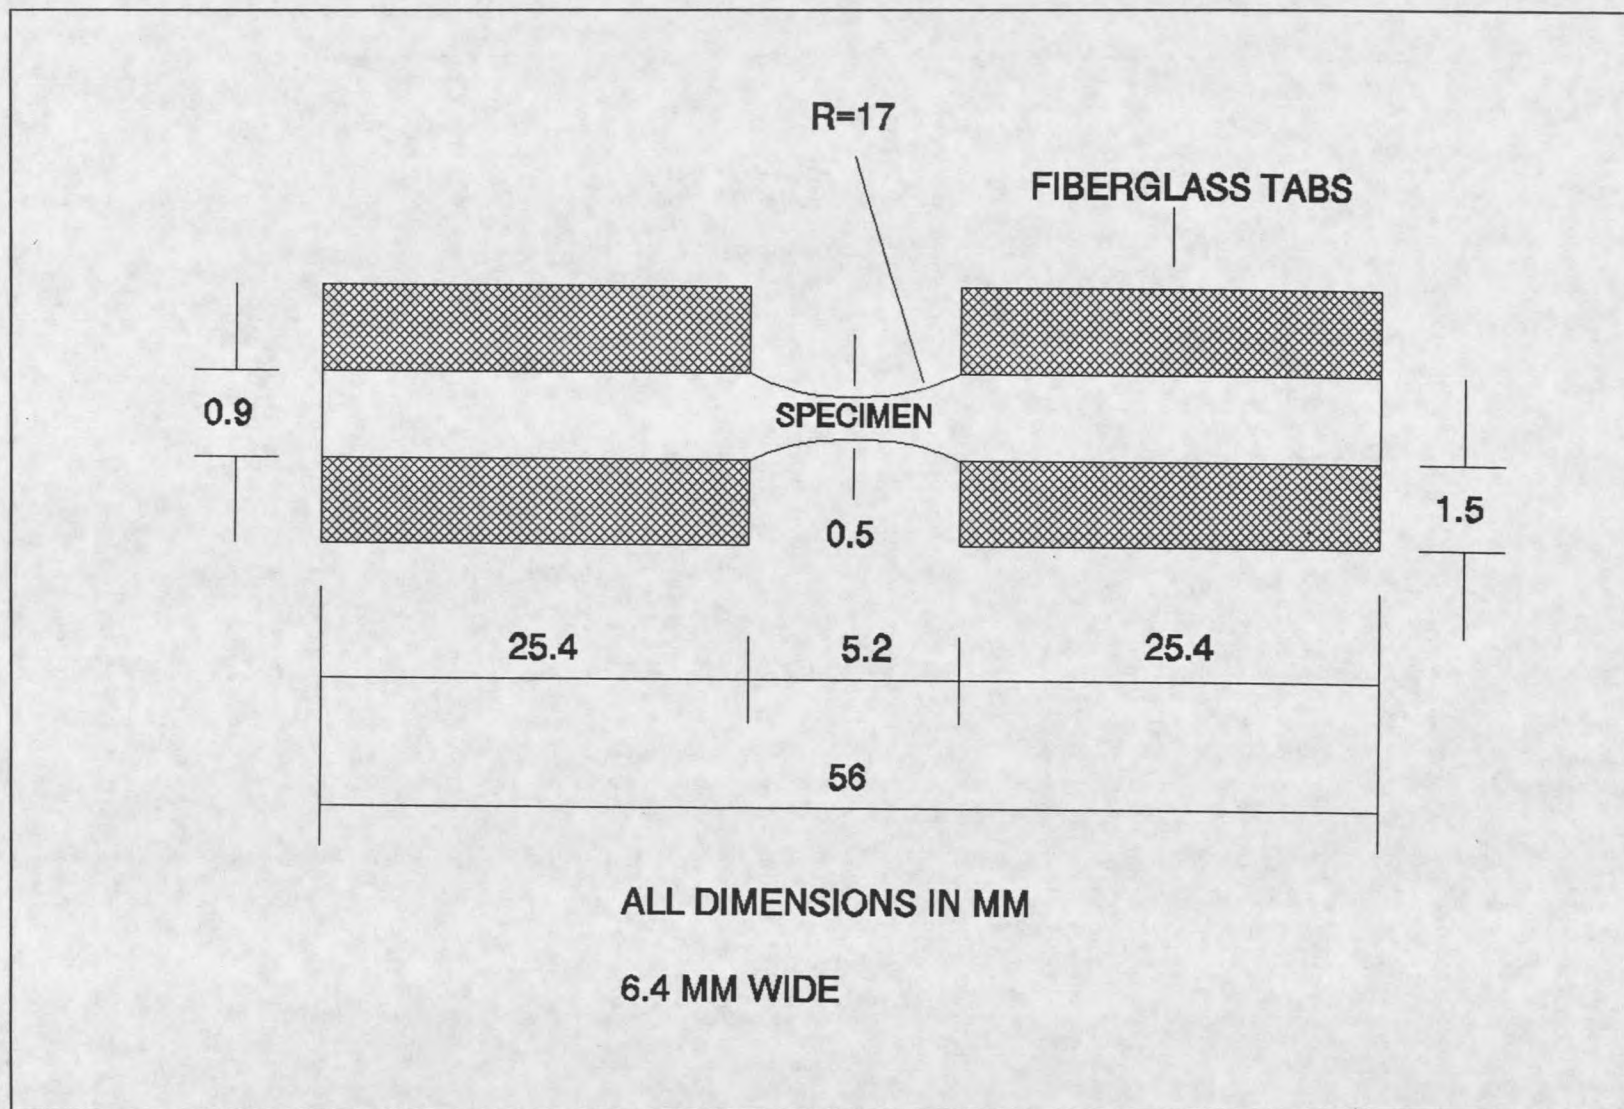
Geometry of Longitudinal Reversed Loading Specimen.
